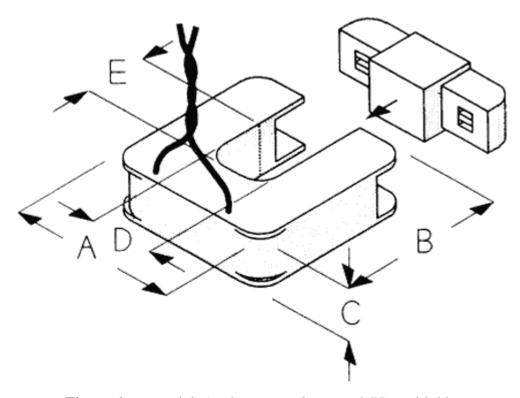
ML-SCT-010-xxx dimensions
